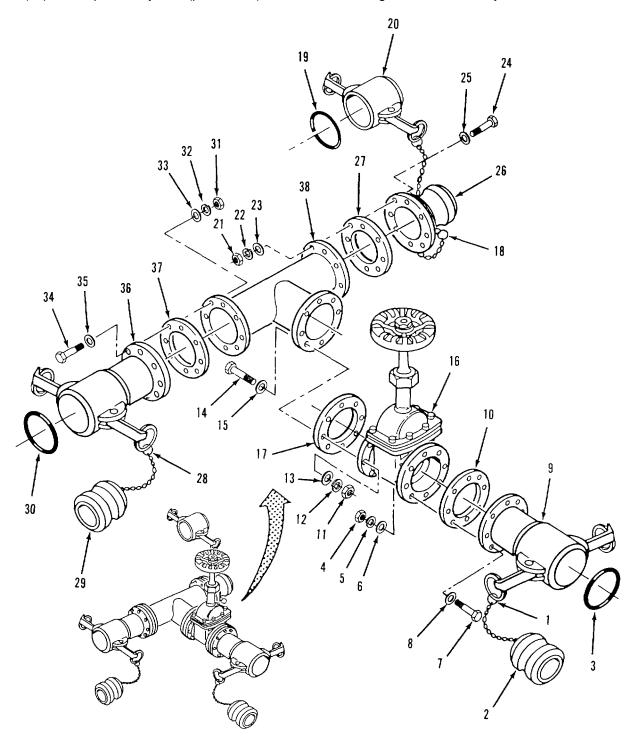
Tee and Gate Valve Assembly (9114-Y5) Repair.
